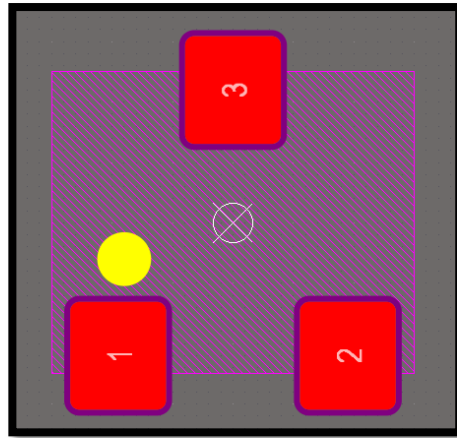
The PCB Footprint for the NPN-BJT; BC817-40,215
